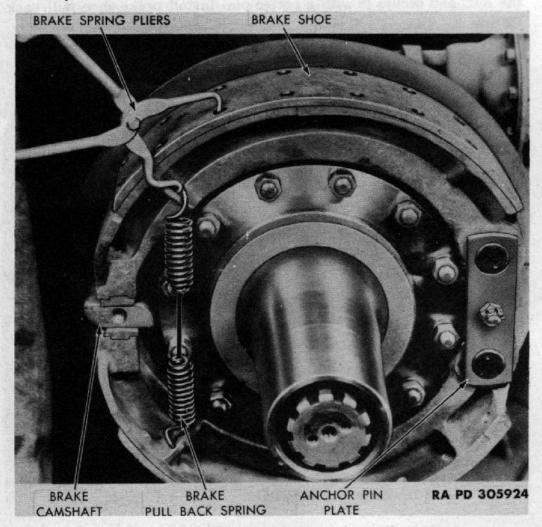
Removing Brake Pull-back Spring with Pliers 41-P-1579
